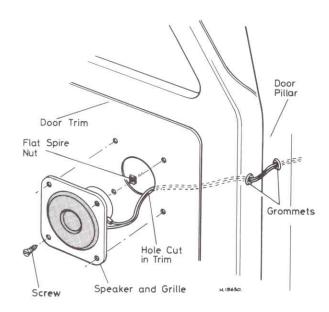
Door-mounted speaker installation (Sec 29)
